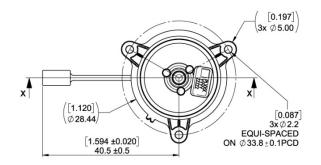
US Mounting Geometry. Dimensions in mm [inches]
